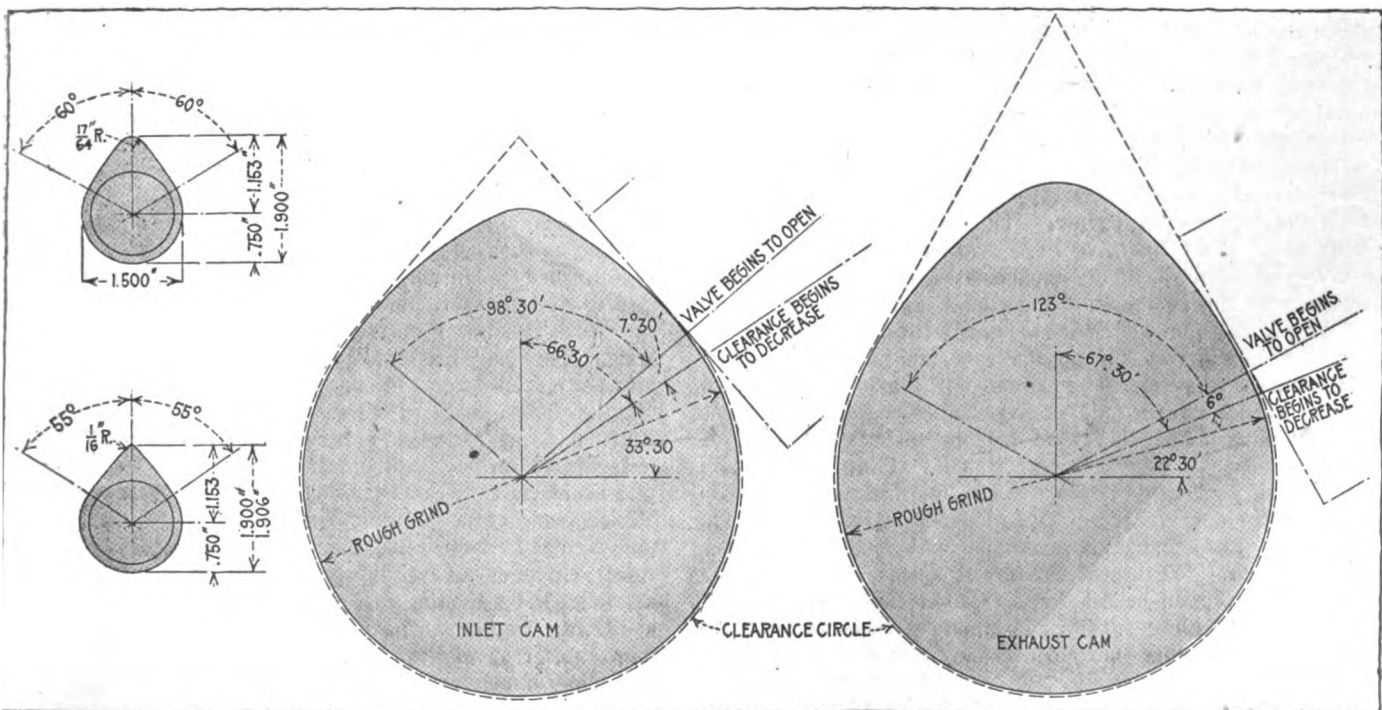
Left, curved exhaust and inlet cams. Right, enlarged view of cams, showing clearance circles
